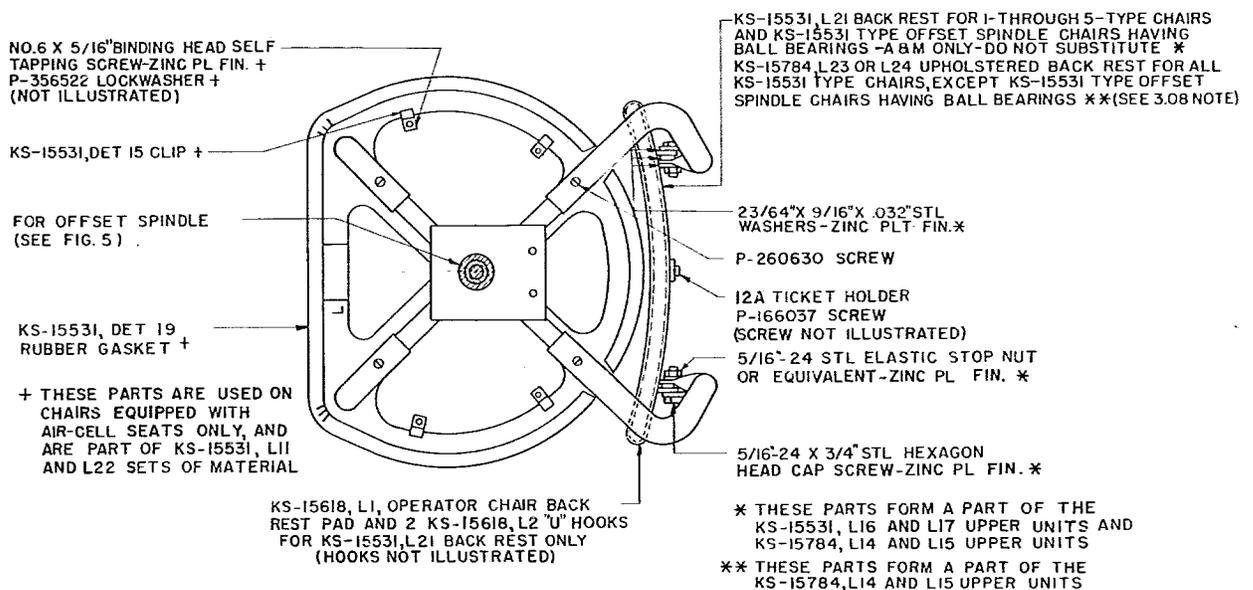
Bottom View of Upper Unit - KS-15531-type Operator Chairs
